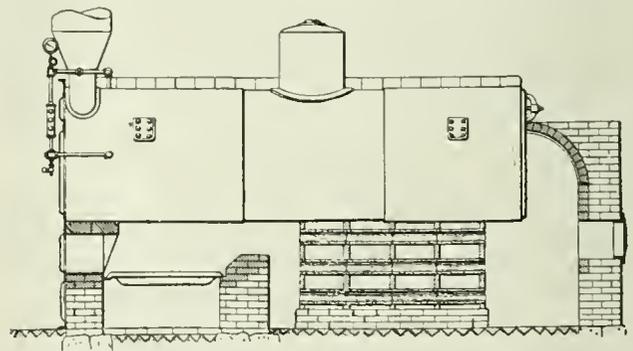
SECTIONAL ELEVATION SHOWING GAS CONSUMER
